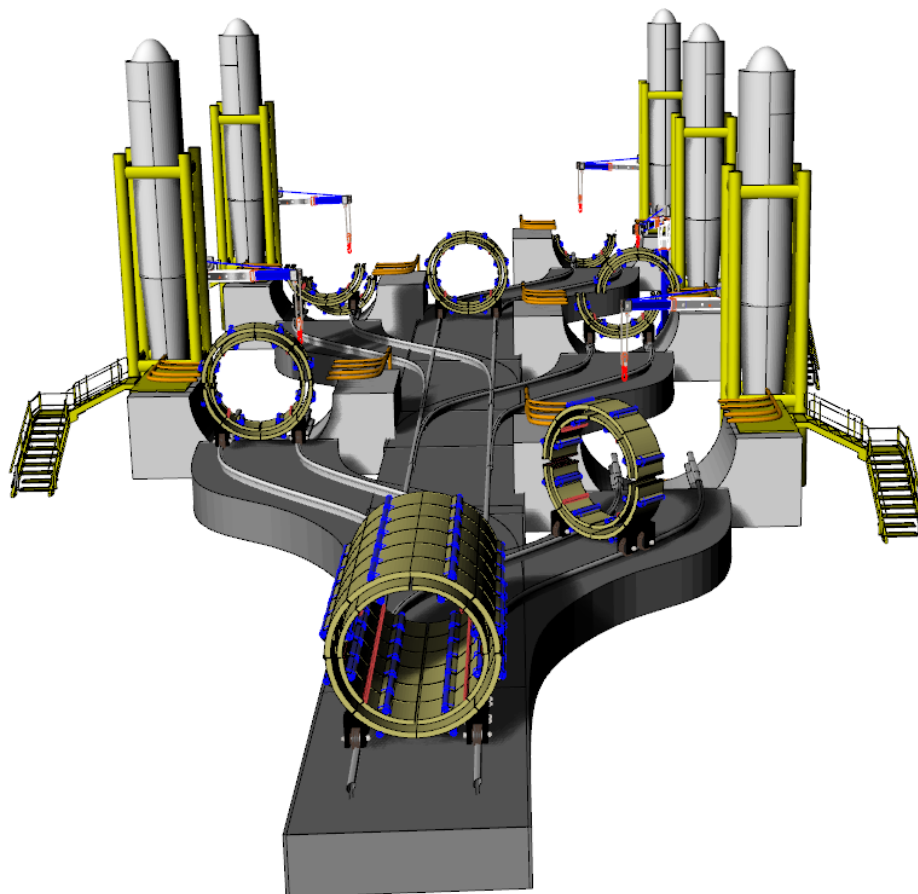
3D Front view of Assembly-line with 5 Stations.
